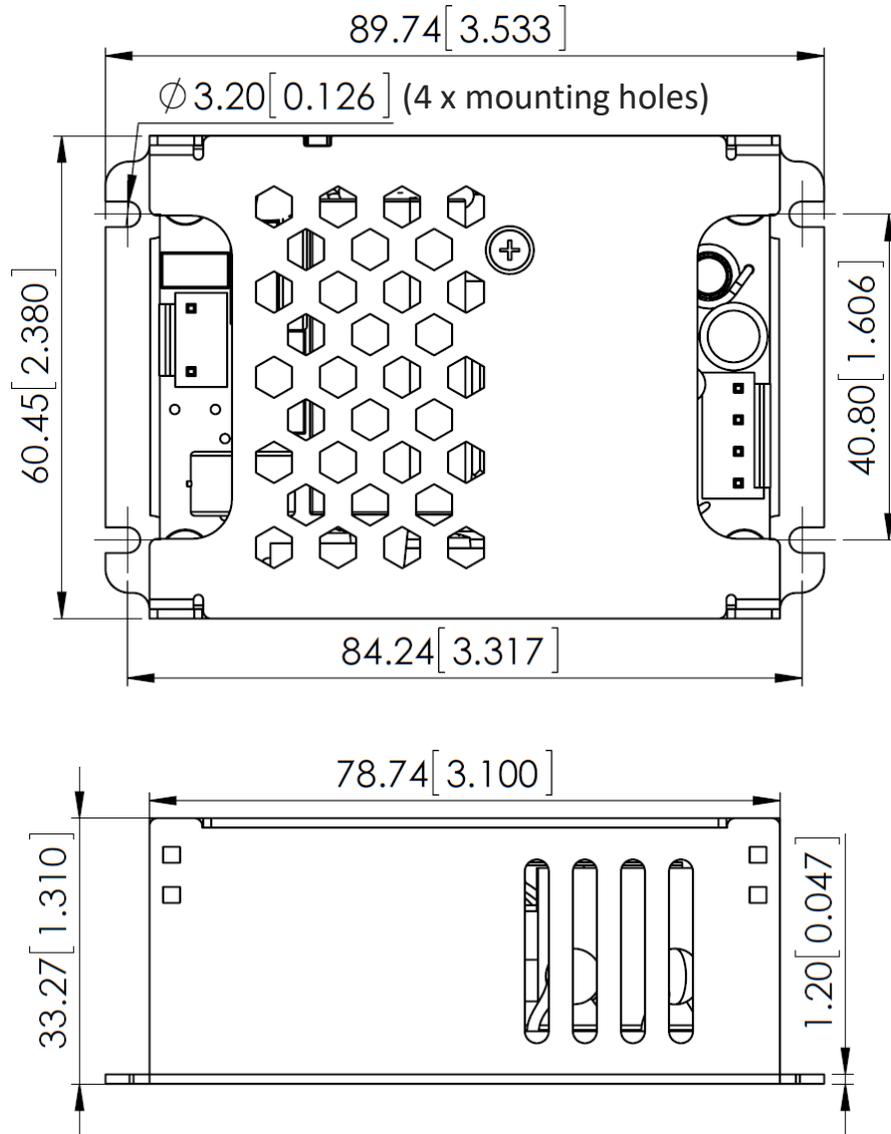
MLE40 models: Mounting Hole Locations and Dimensions
